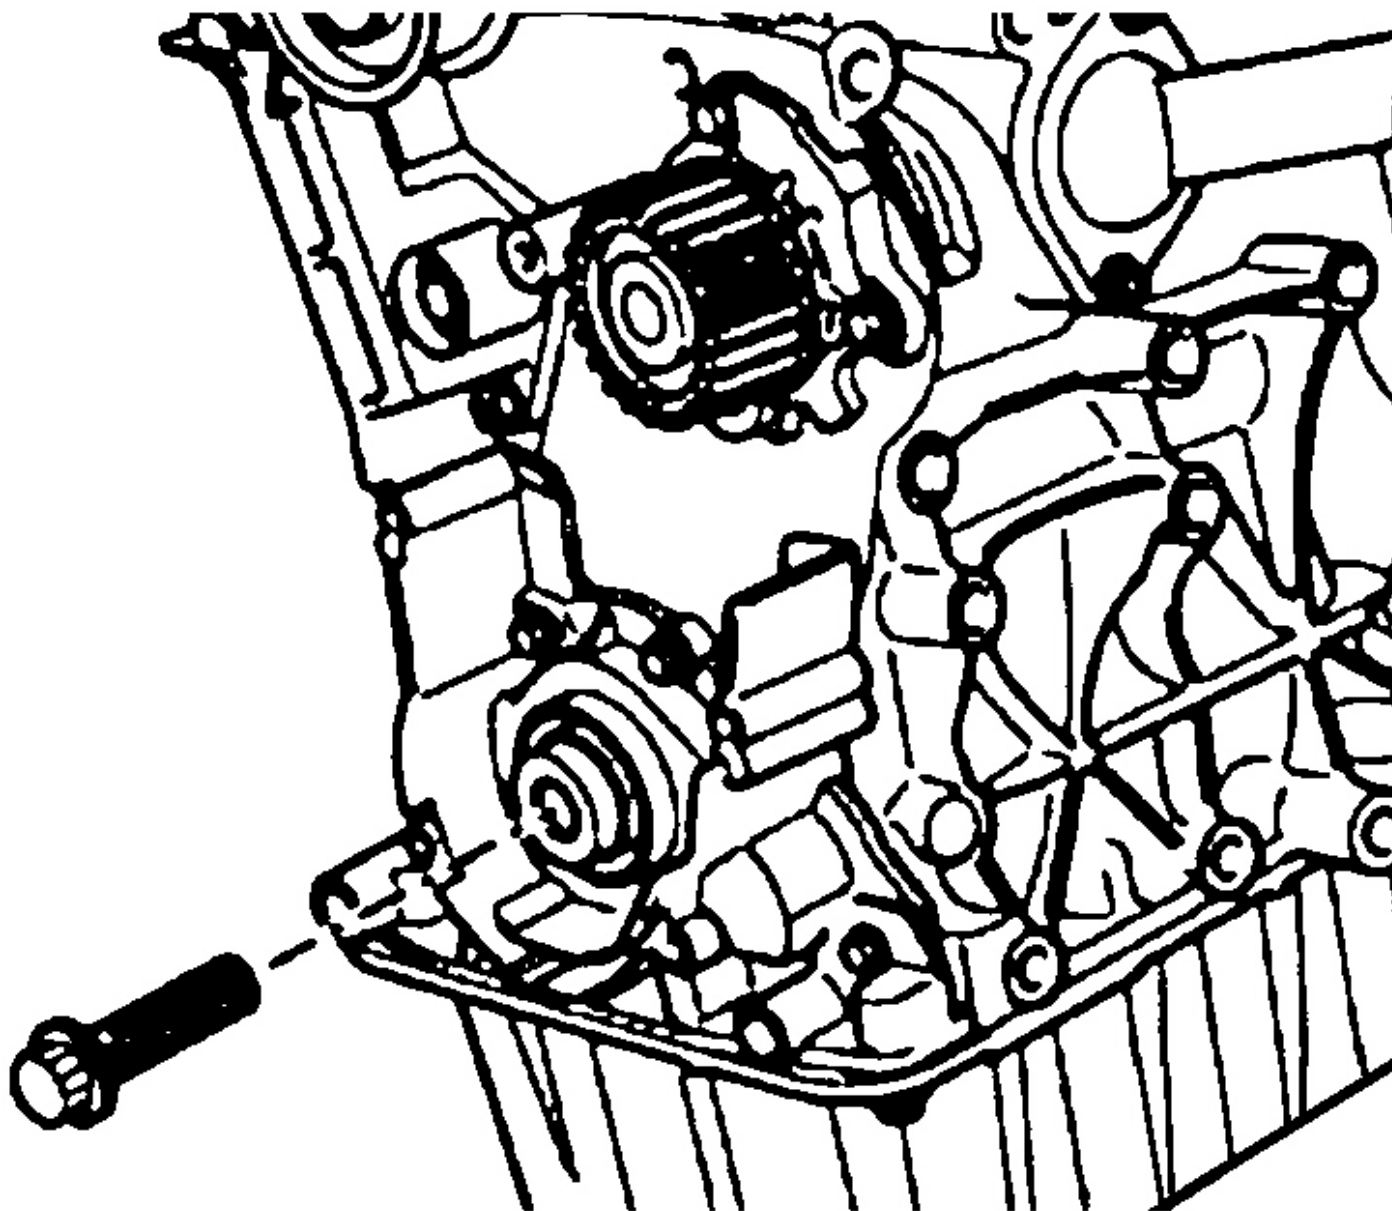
Identifying Crankshaft Oil Seals & Front & Rear Sealing Flanges
